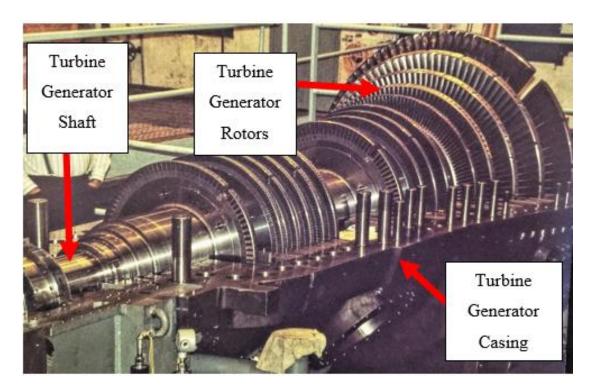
TG1 Installation (Wade Utility Plant, n.d.)
